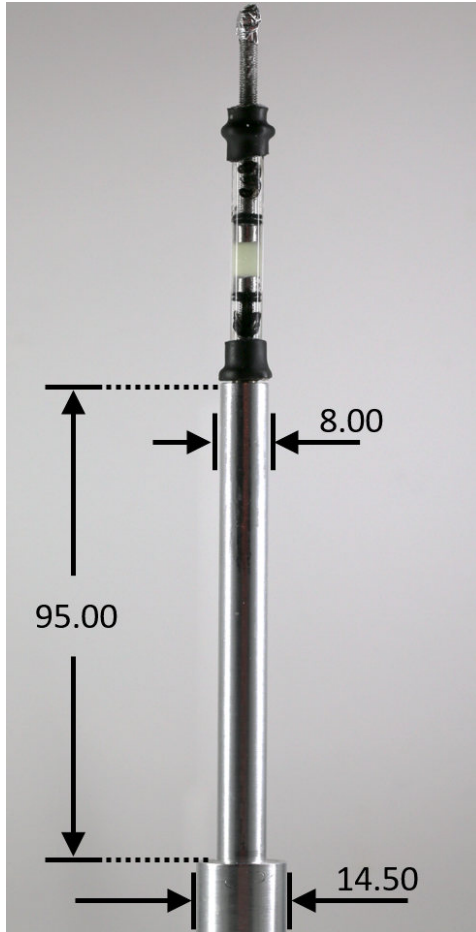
Custom-holder. Dimensions in millimeters.
